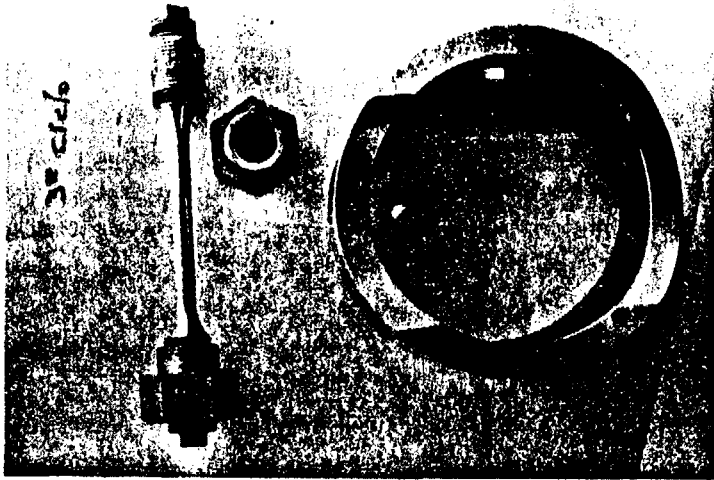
Stress corrosion specimen stripped down with sodium on the thread
